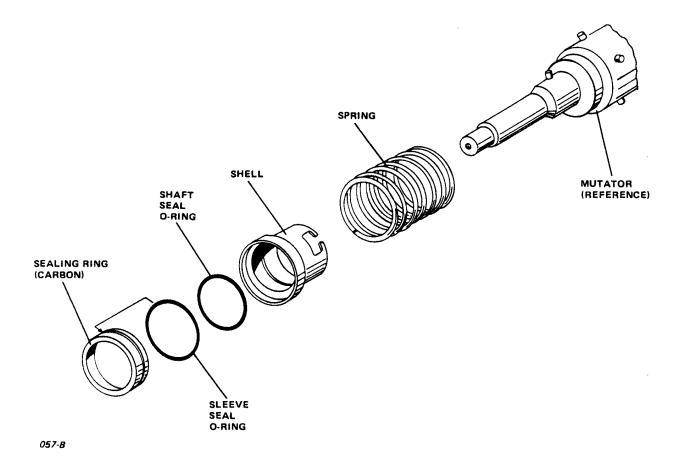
Mechanical Rotary Seal-Parts Identification
